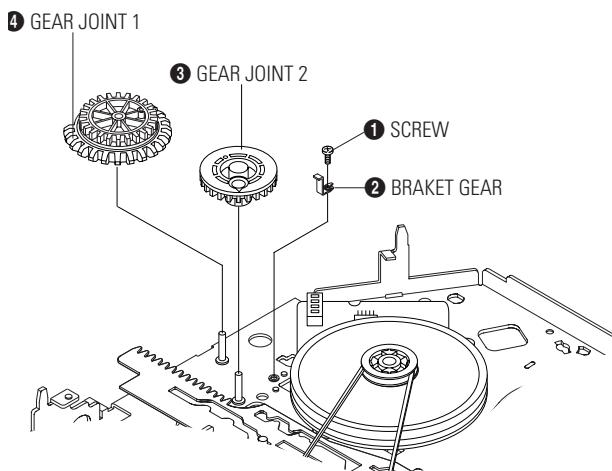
Bracket Gear, Gear Joint 1,2 Removal
